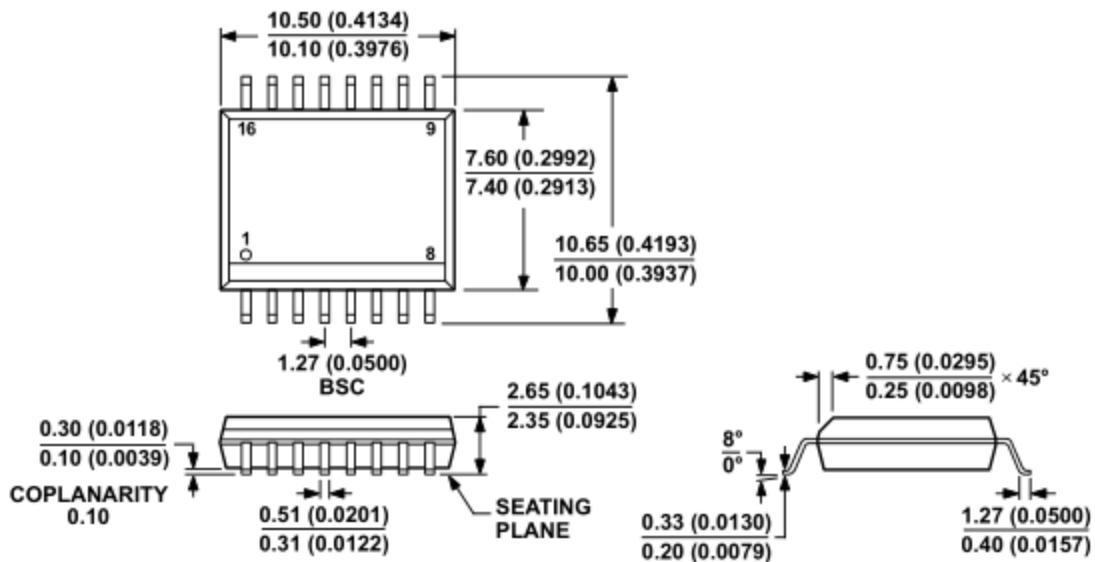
WB SOIC-16 Package Shape and Dimension in millimeters (inches)
